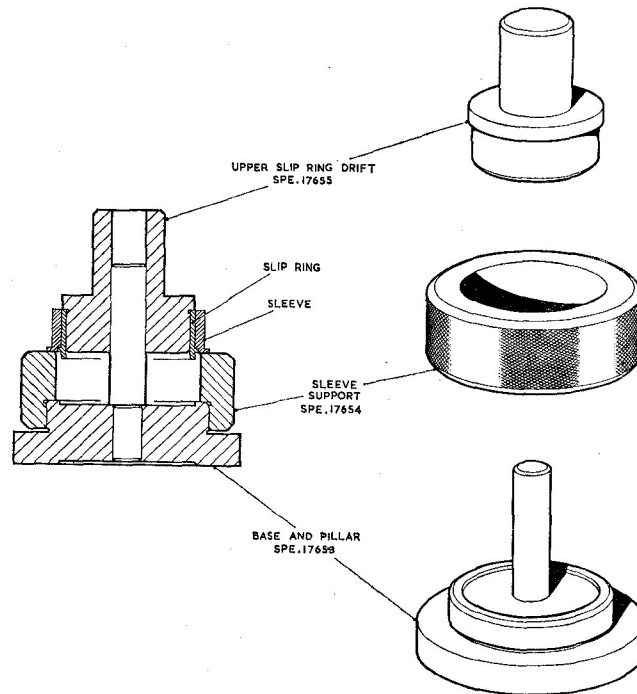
Tools for assembling the top casing slip-ring and distance sleeve
